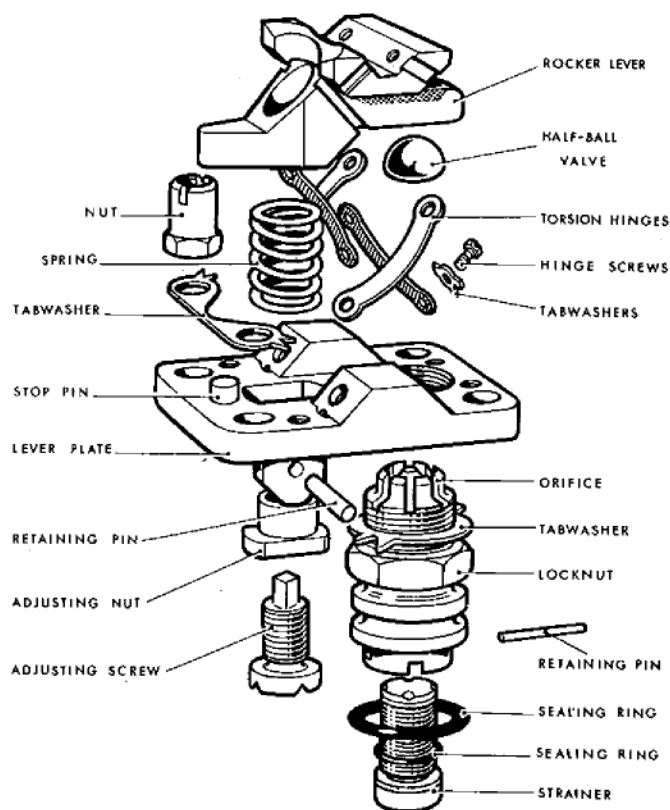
Exploded view of rocker lever plate and orifice assembly
